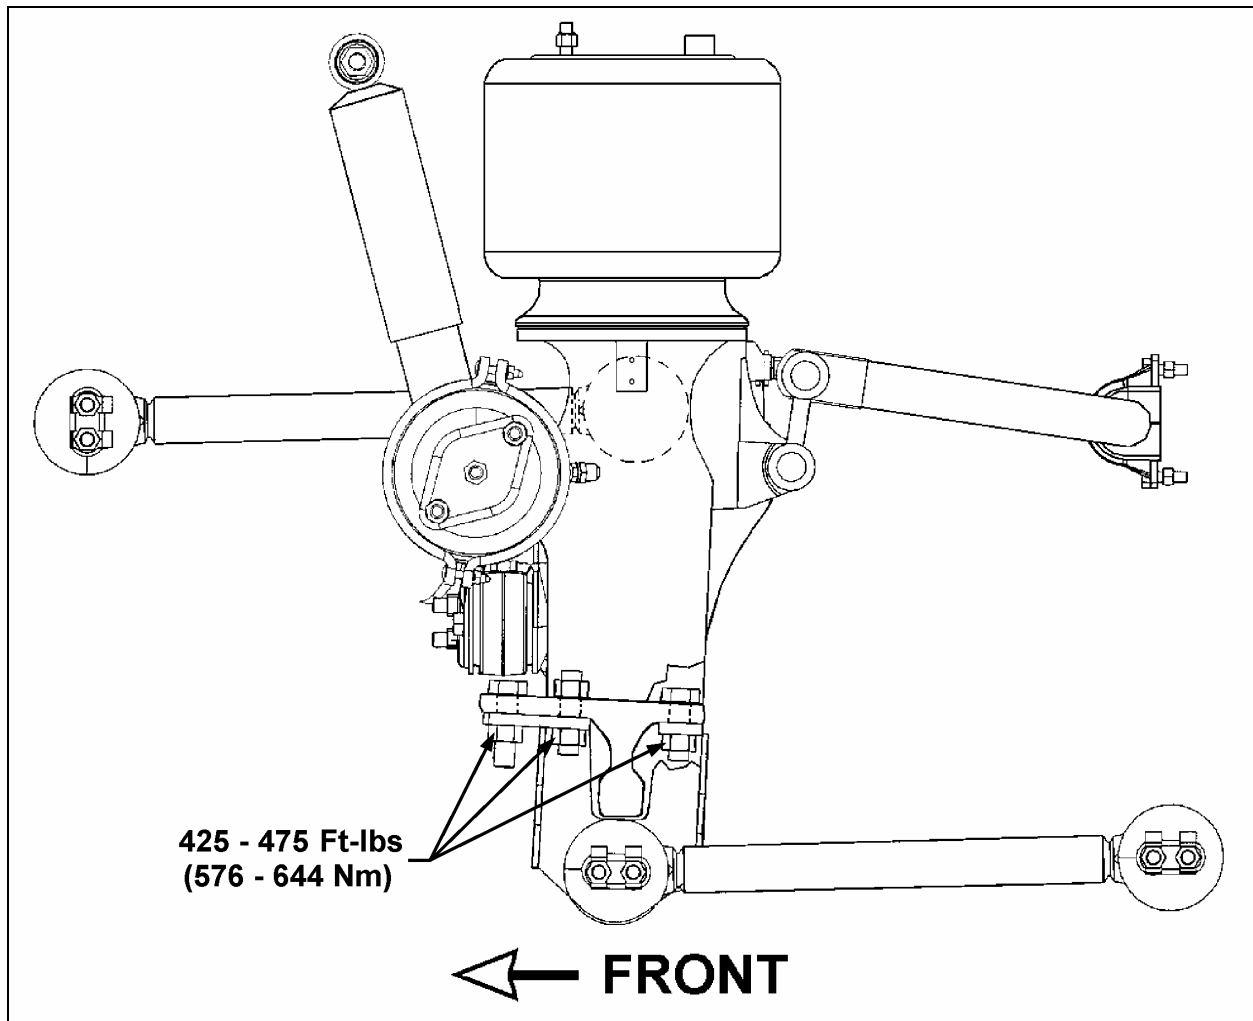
AIR BELLOWS MOUNTING SUPPORT AND AXLE
